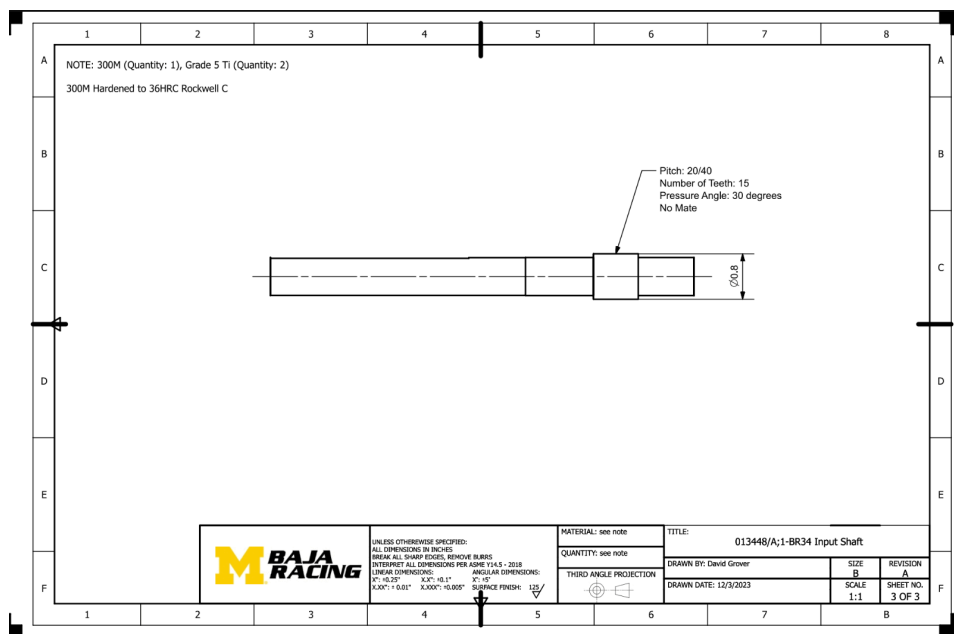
Part drawing of the input shaft for Modified to reference with important callouts of the pitch, number of teeth, and pressure angle.
